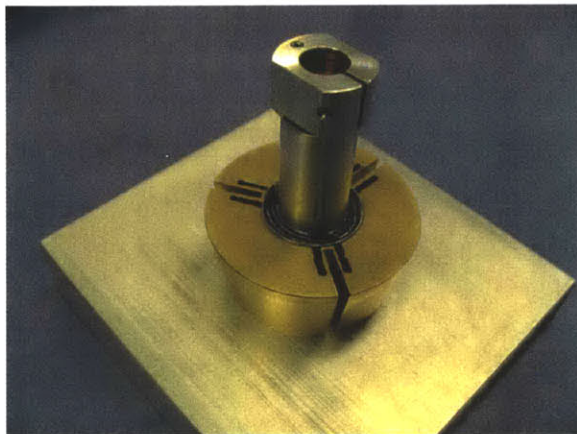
Bearings, Collet and Shaft in bearing assembler unit.
